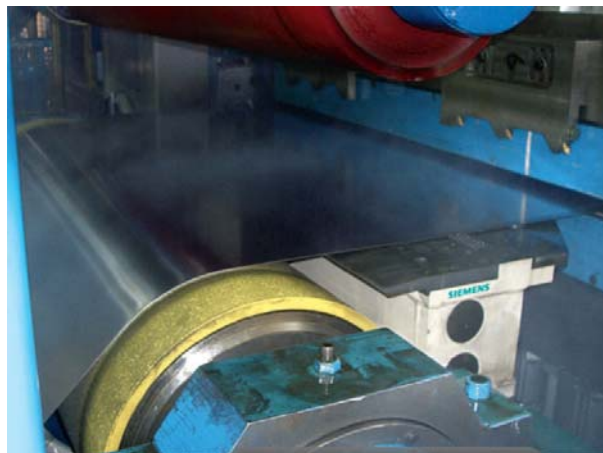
SIFLAT non-contact flatness measurement system installed on a 20-Hi mill
